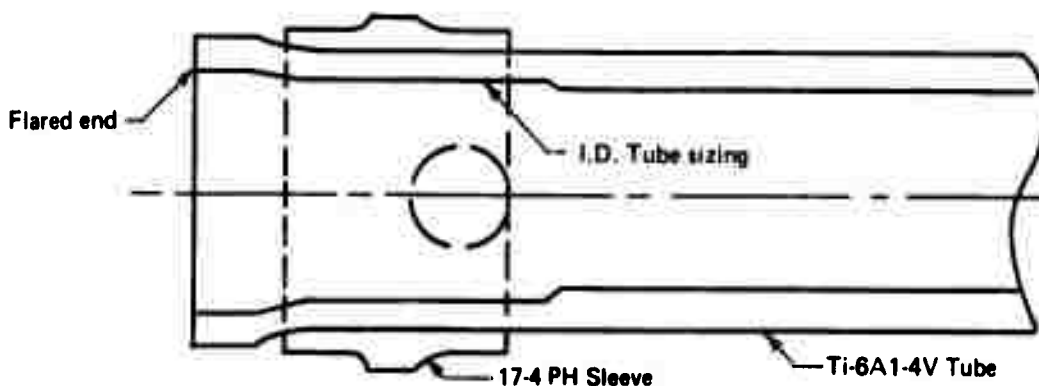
MIL-FLO FITTING AND TUBE CONFIGURATIONS
